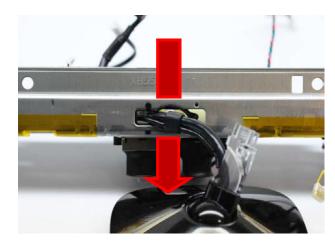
Xbox 360 cables can now be removed. The red arrow indicates the path to which the cable is to be removed.
